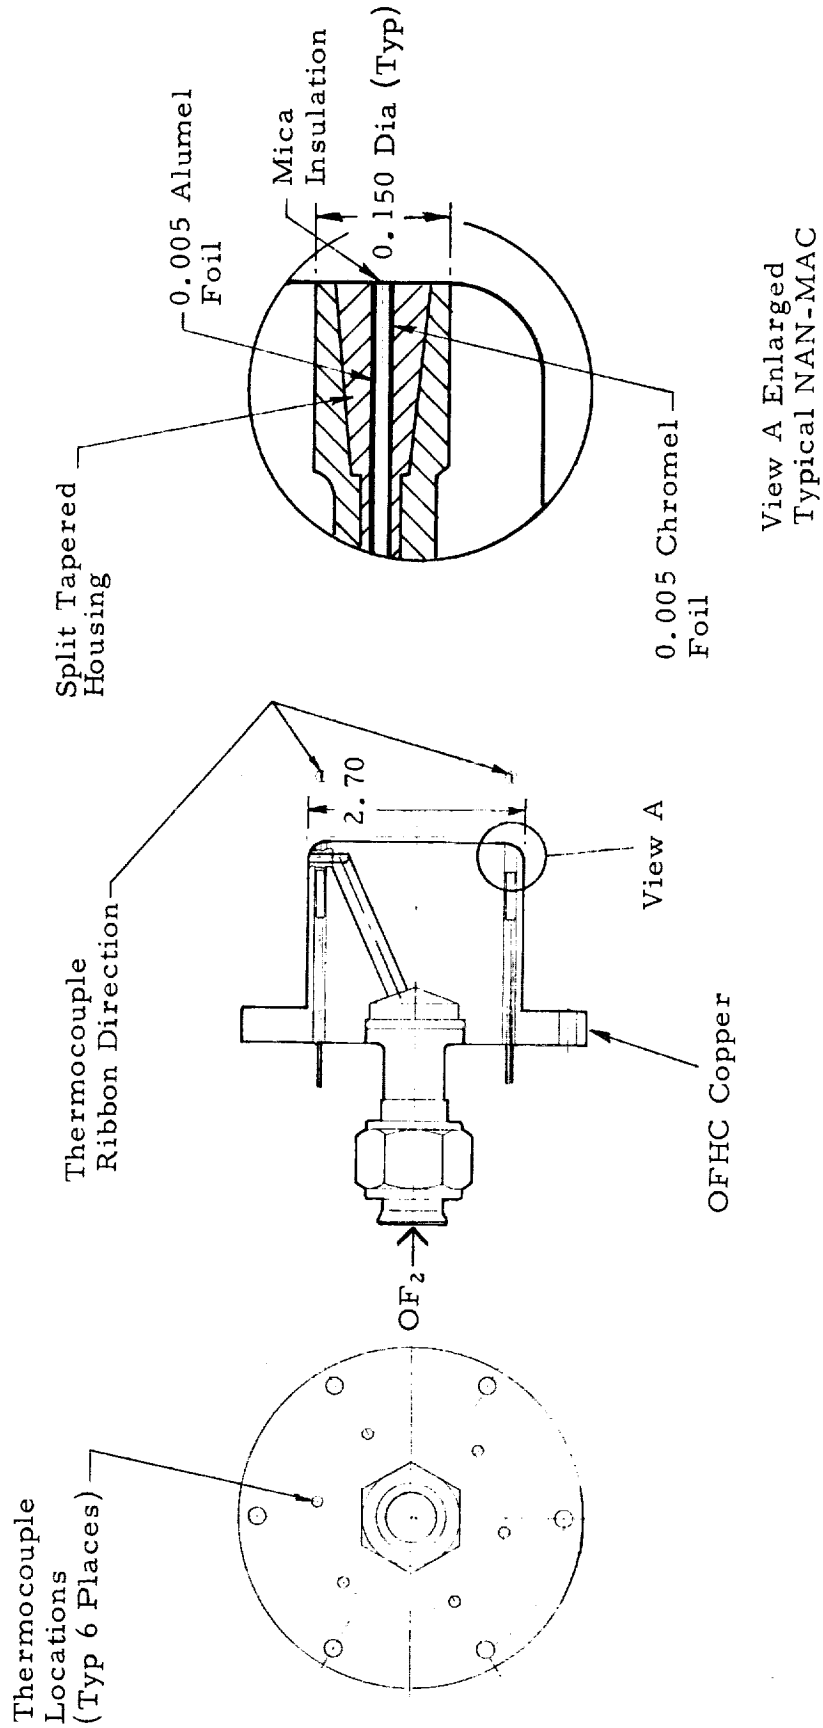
Typical Instrumented Heat Sink Oxidizer Injector Assembly
